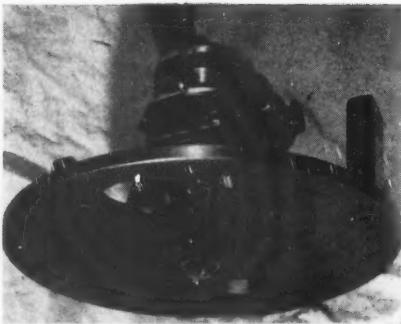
Nether view of the Quackenbush hand router, showing two-fluted one-inch cutter, and plate for adjusting depth of step cut.
